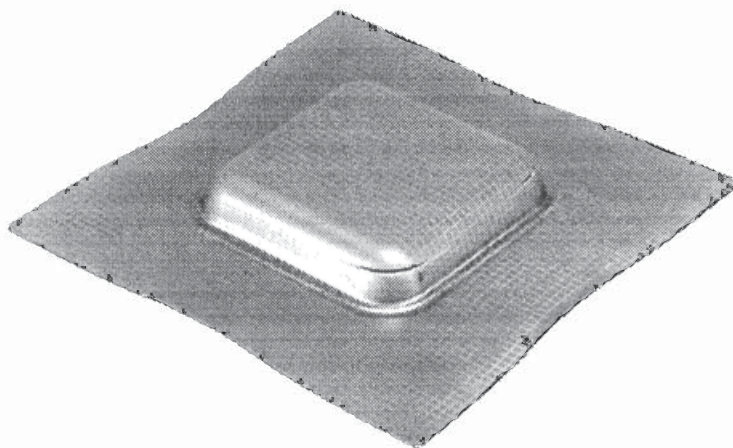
Deep drawn aluminum box that shows a typical corner failure in the region around the punch shoulder radius.
